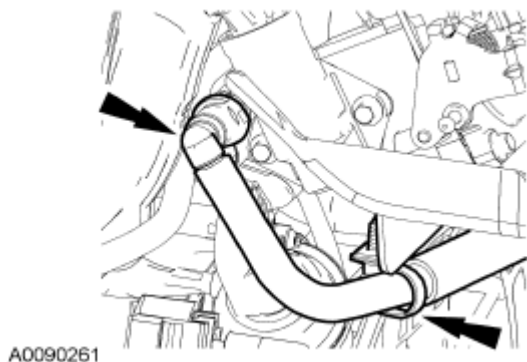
Locating Fuel Vapor Return Tube & Retainer
